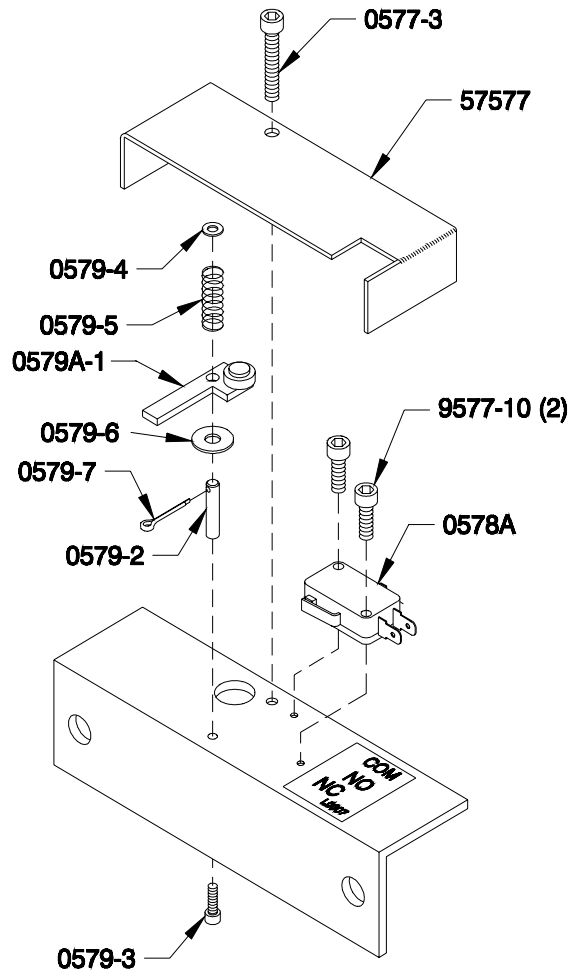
Reversing Switch, (Part No. 18745-10-1), Exploded View
